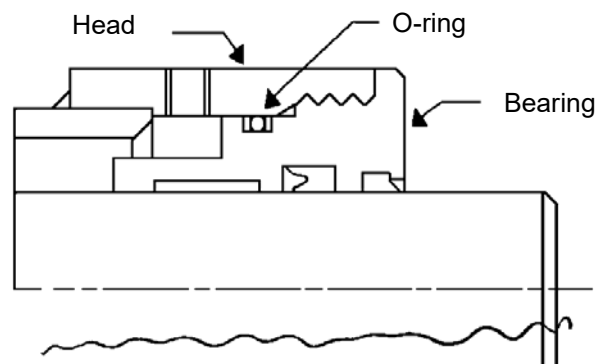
Cylinder Rod Seal Assembly with O-ring
